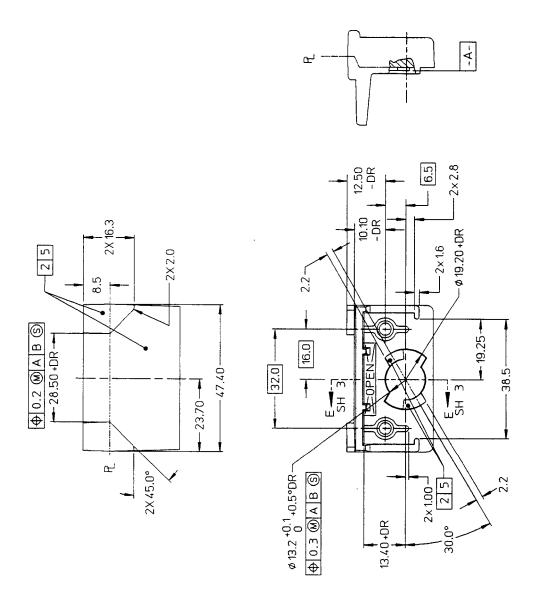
, HOUSING, LATCH SHEET 2 OF 4
